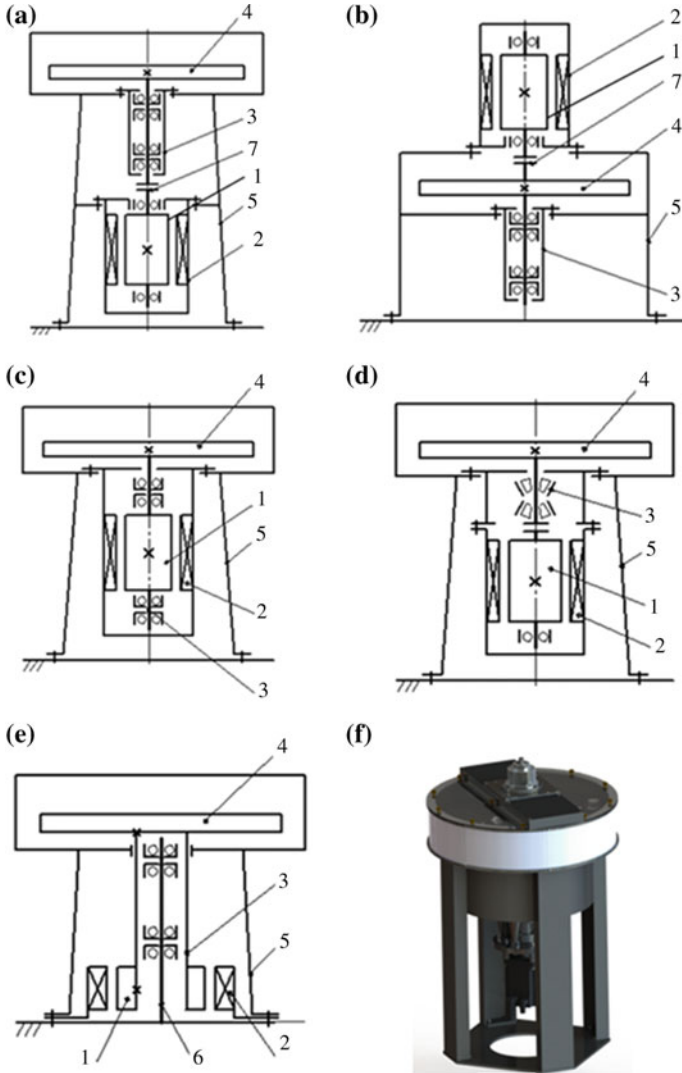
Configurations of centrifuges with direct drive: a with “high” rotor; b with a motor located above a rotor; c with a motor spindle; d with a modernized motor; e with a motor spindle on a column; f PC18 centrifuge, manufactured by Deltamec (RF); 1 motor rotor, 2 motor stator, 3 spindle, 4 centrifuge rotor, 5 support structure, 6 column, 7 coupling
